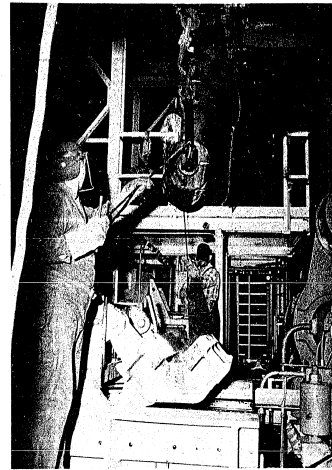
(f) - A BILLET BEING TRANSFERRED FROM THE FURNACE TO THE BILLET LOADING TABLE
